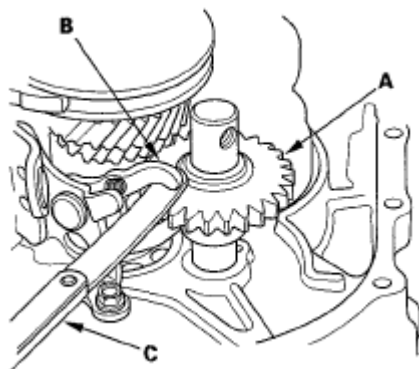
Identifying Reverse Idler Gear, Reverse Shift Fork And Feeler Gauge
